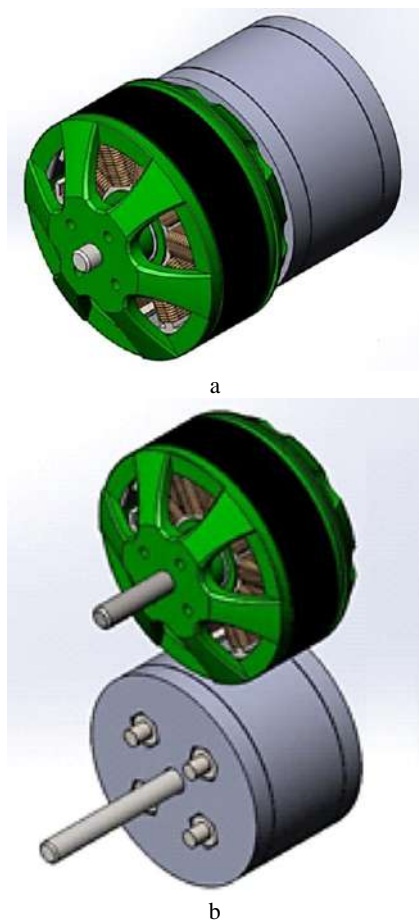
Assembly of the BLDC electrical motor (a) and the cycloidal reducer (b)
